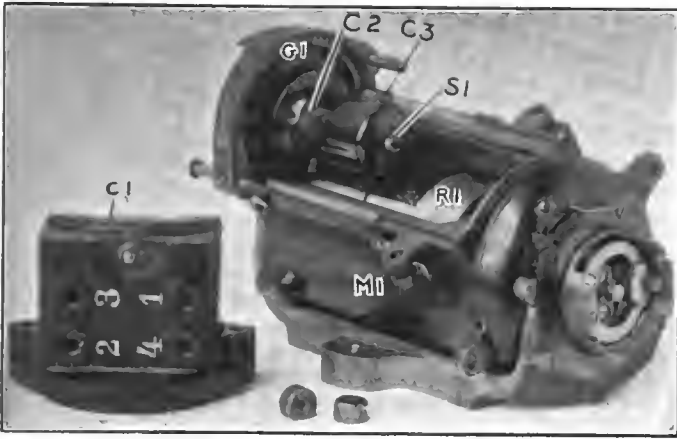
When the cover is taken off, showing the interior, with a good view of the rotor and other parts
